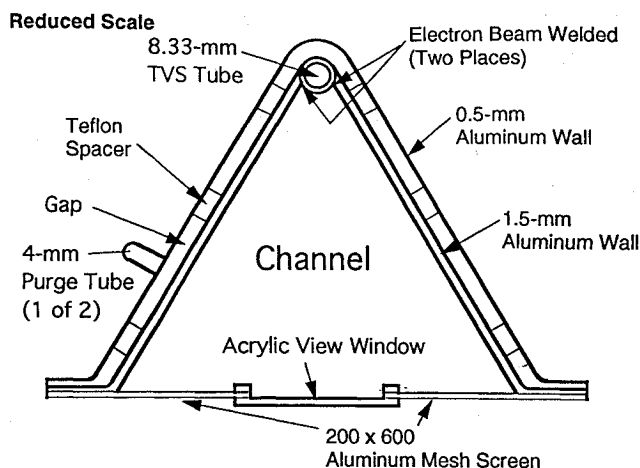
Design drawing for apex-mounted heat exchanger, 1 g test article (cross-sectional axial view).
